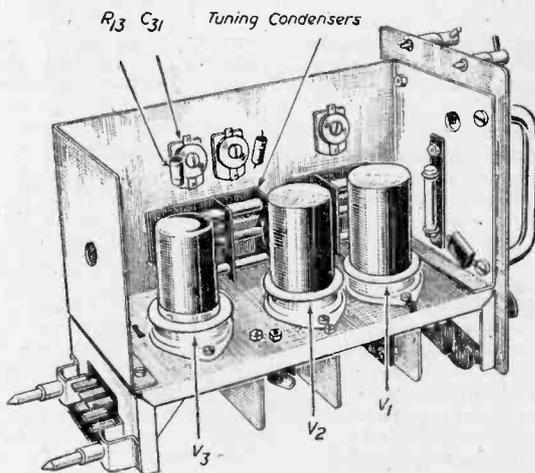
Pictorial diagram of the Unit with essential markings. Condenser C31 and resistor R13 are removed. Other modification details are shown in Fig. 2 on the next page.
